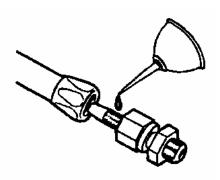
Low- and Medium-Pressure Hose Assembly Lubrication
